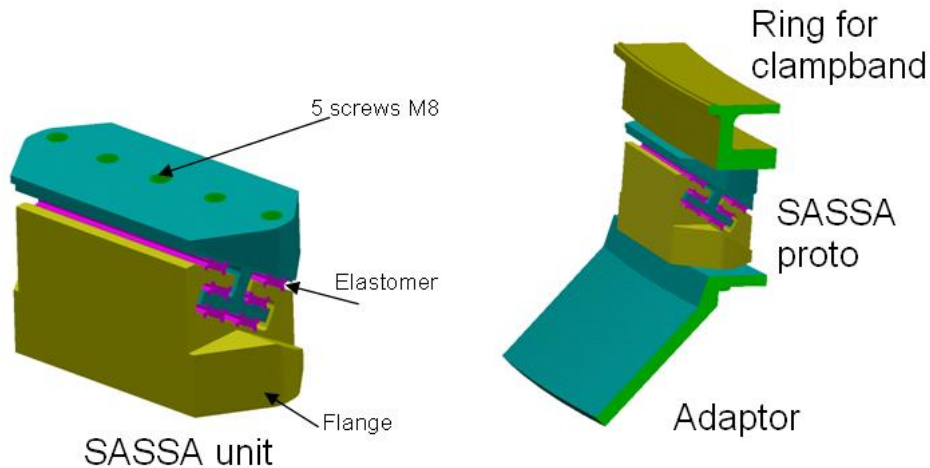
SASSA unit and assembly with adaptor and clampband ring
